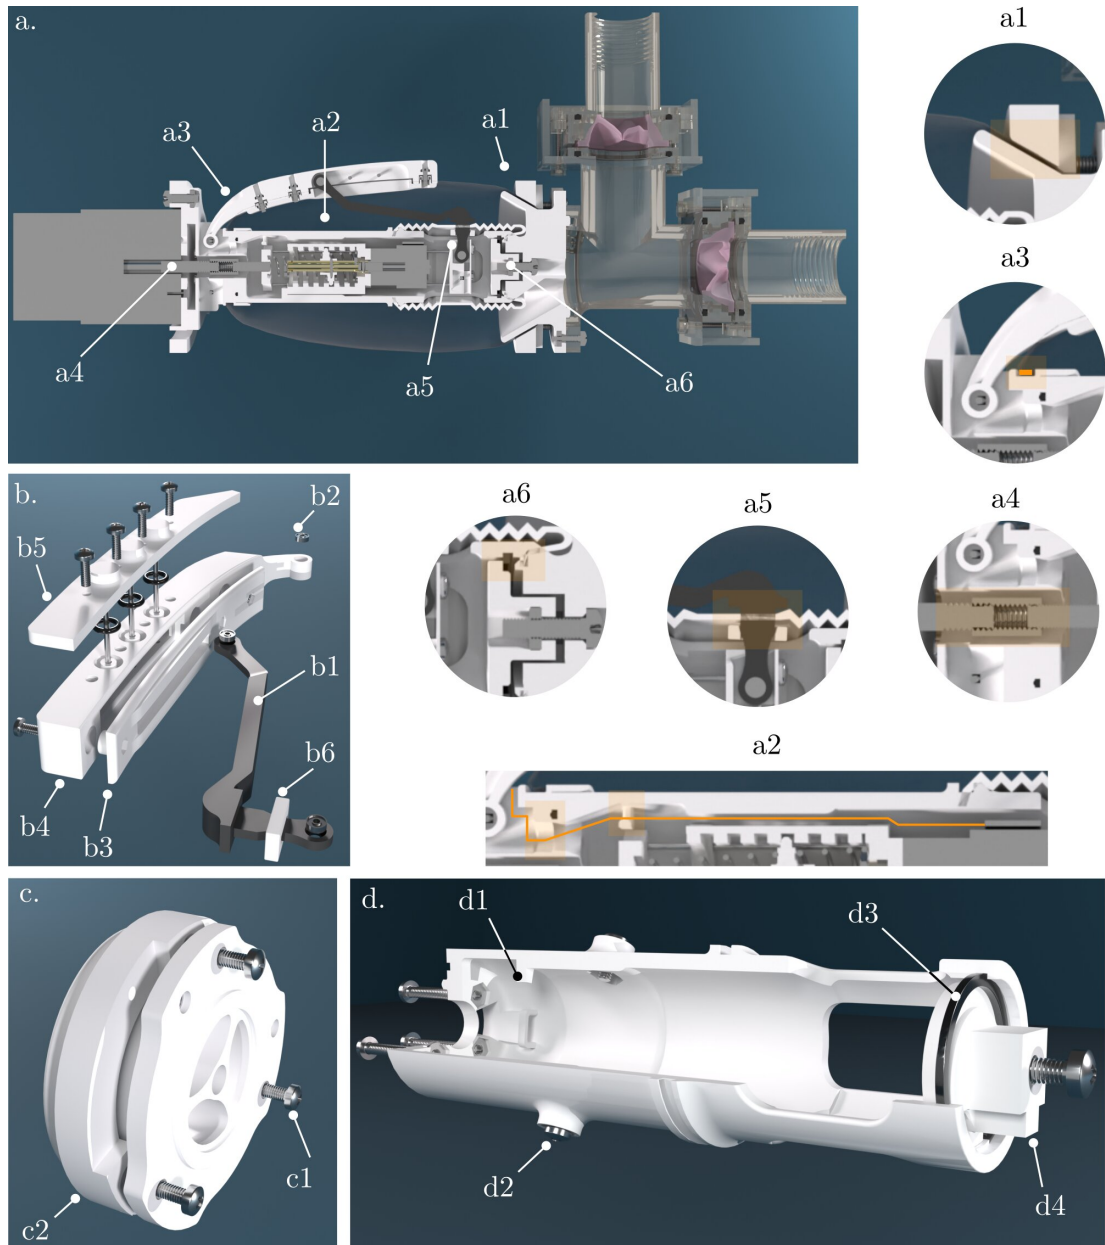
a. Cut view of the pump showing selected design features. b. Exploded view of the rib-lever arm assembly. c. Cone locking mechanism used to secure the main membrane. d. Partial section view of the protective tube.
